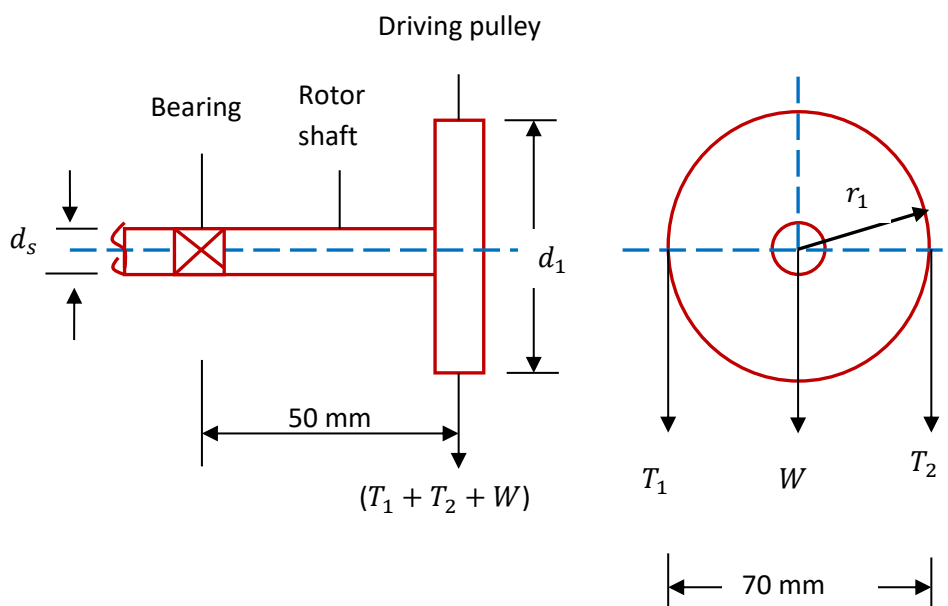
Link between the rotor shaft and the driving pulley (Khurmi and Gupta, 2005).
